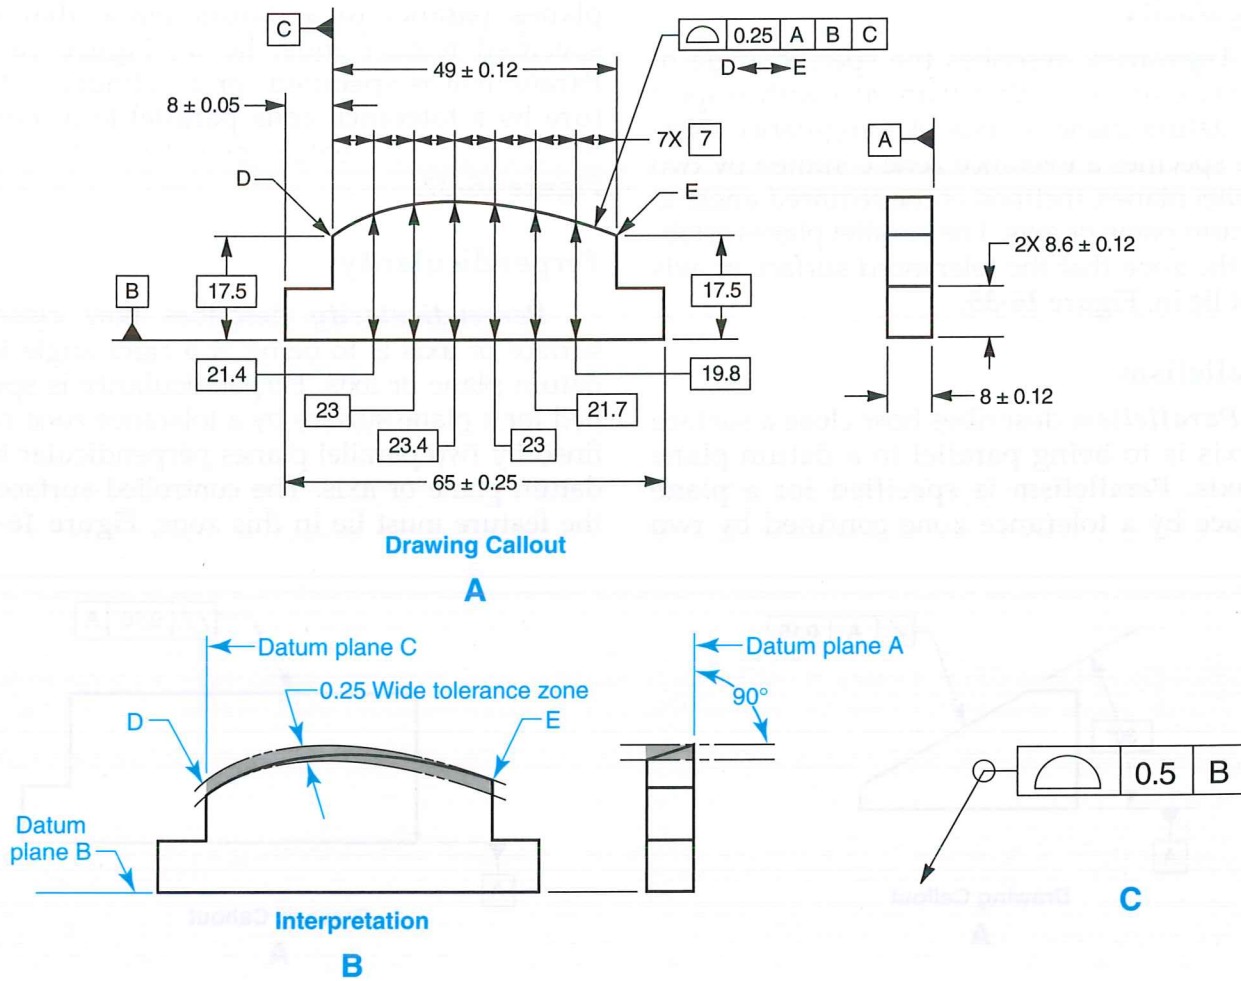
Profile tolerance zones indicate how far from the basic dimension a surface can vary. Profile tolerances can be bilateral or unilateral. (American National Standards Institute)
